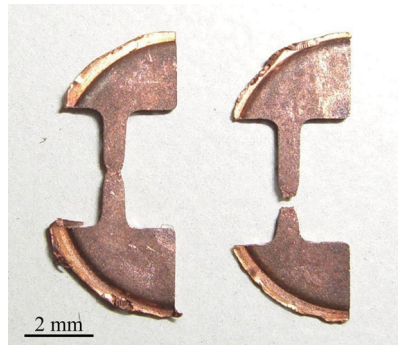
Picture of two Cu tensile specimens nearly fractured (left) and totally fractured (right).
